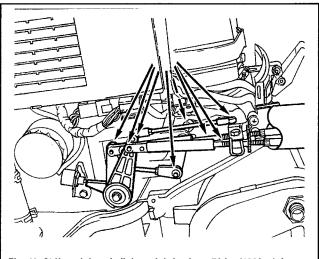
Shift and throttle linkage lubrication - 70 hp (1298cc) 4cylinder, 4-stroke motors
